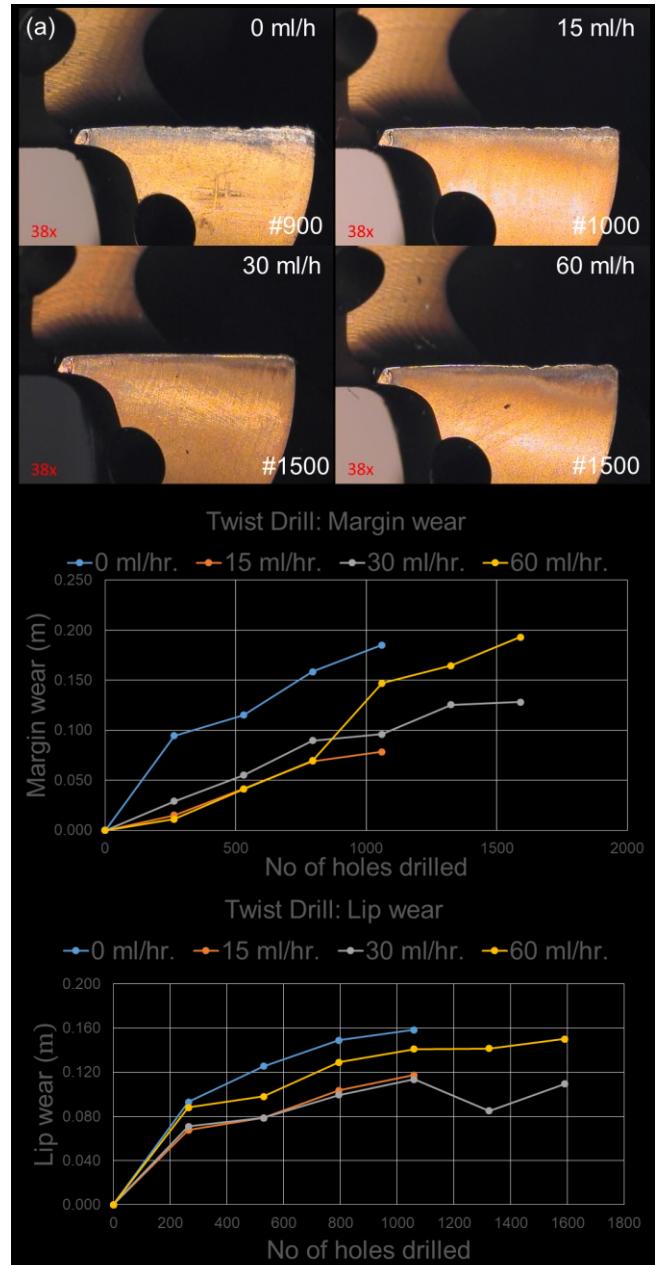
TOOL WEAR IN TWIST DRILLS (a) TOOL WEAR OF CUTTING EDGE AFTER THE END OF TOOL LIFE (b) MARGIN WEAR AT DIFFERENT NO OF HOLES DRILLED (c) LIP WEAR AT DIFFERENT NOF OF HOLES DRILLED
